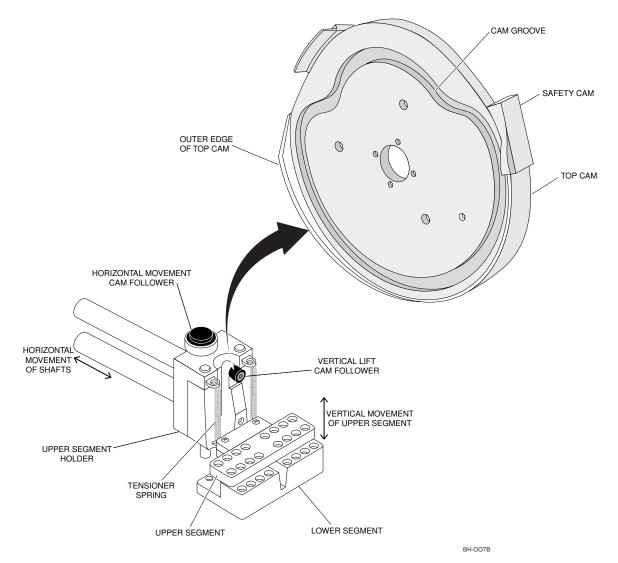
Segment Turret's Top Cam and Vertical Cam-Following Roller of Upper Segment Holder
